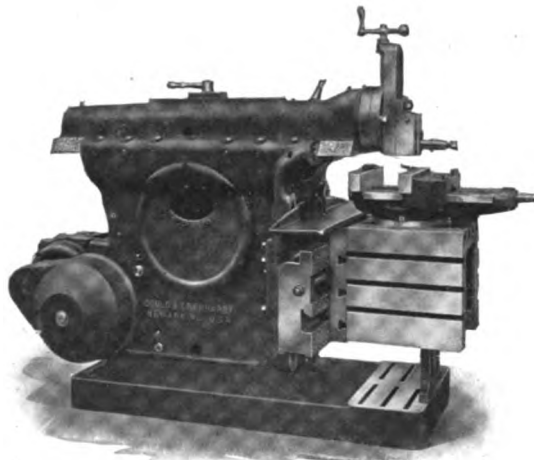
28-inch Shaper—Motor Drive—Driving Gear Side
